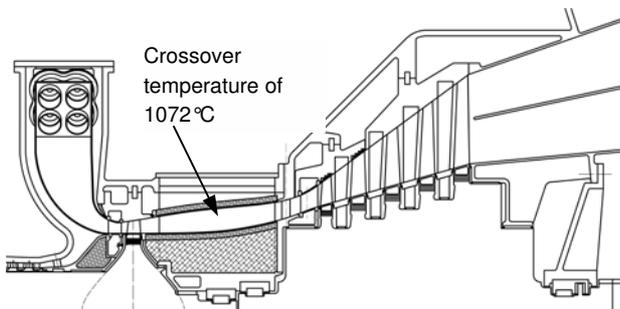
Compressor turbine HTTC (8500 rpm) and crossover to power turbine HTTP (50 Hz).
